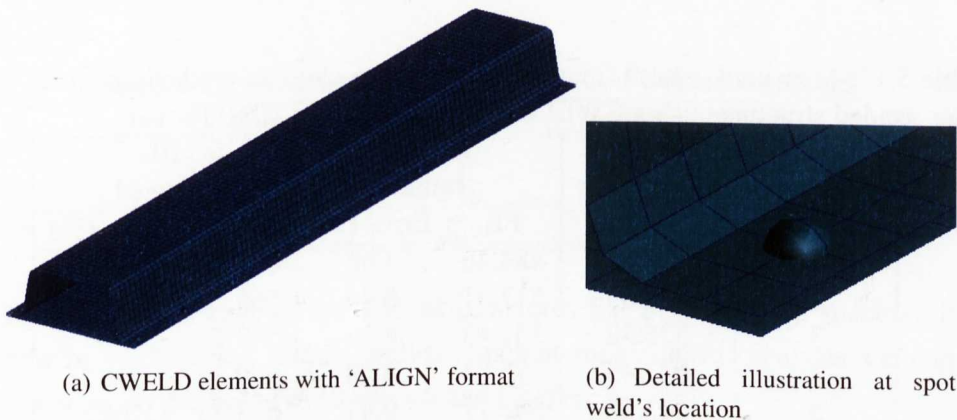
FE model of welded structure using CWELD elements with ‘ALIGN’ format
